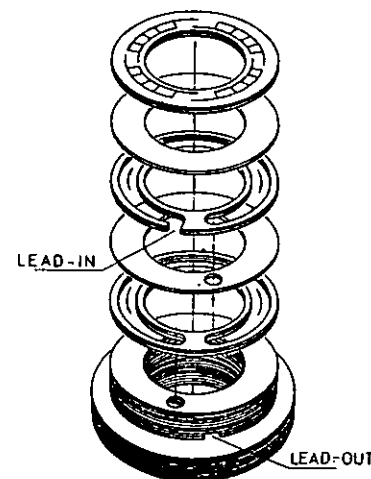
A cooling channel containing seal ring shaped by tape casting followed by punching.¹³
